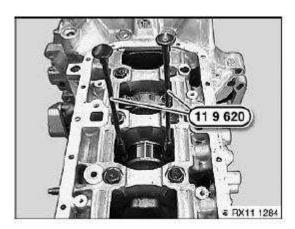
Identifying Special Tool (11 9 620) Courtesy of BMW OF NORTH AMERICA, INC.
